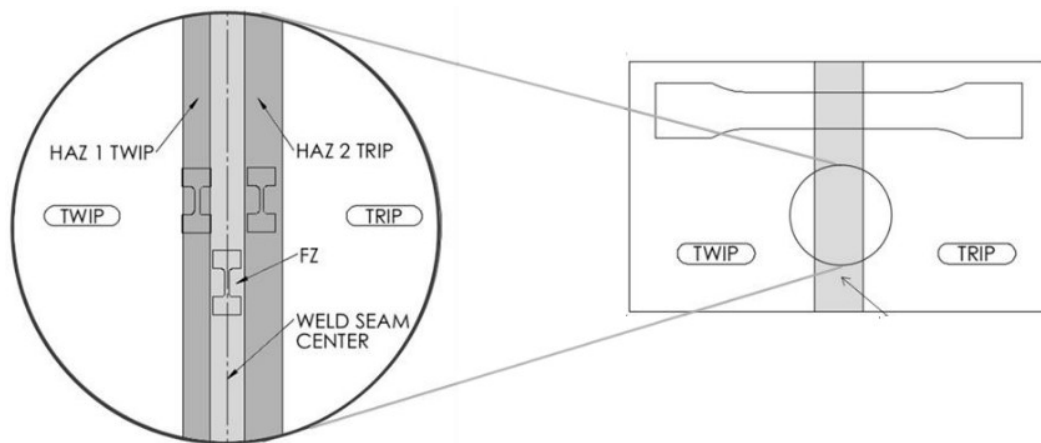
Schematic drawing of the welded TWIP/TRIP coupon with the extraction positions of all specimens. Drawings not to scale.
